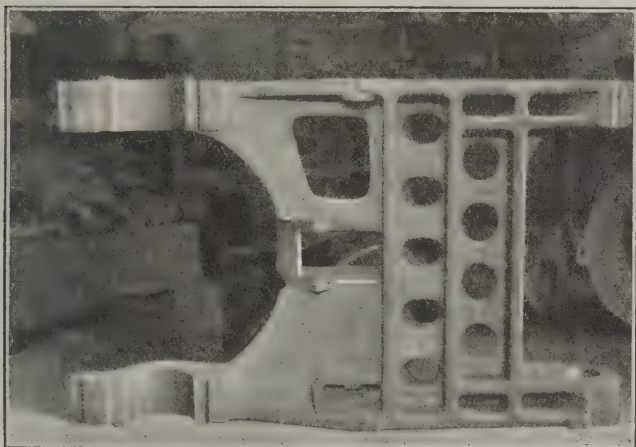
Disappearing Mortar Carriage Casting being bored in Fig. 2
